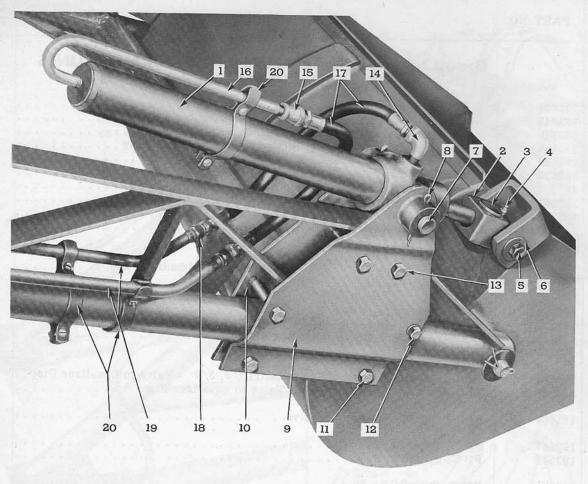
Hydraulic Bucket Control Cylinder Attachments
